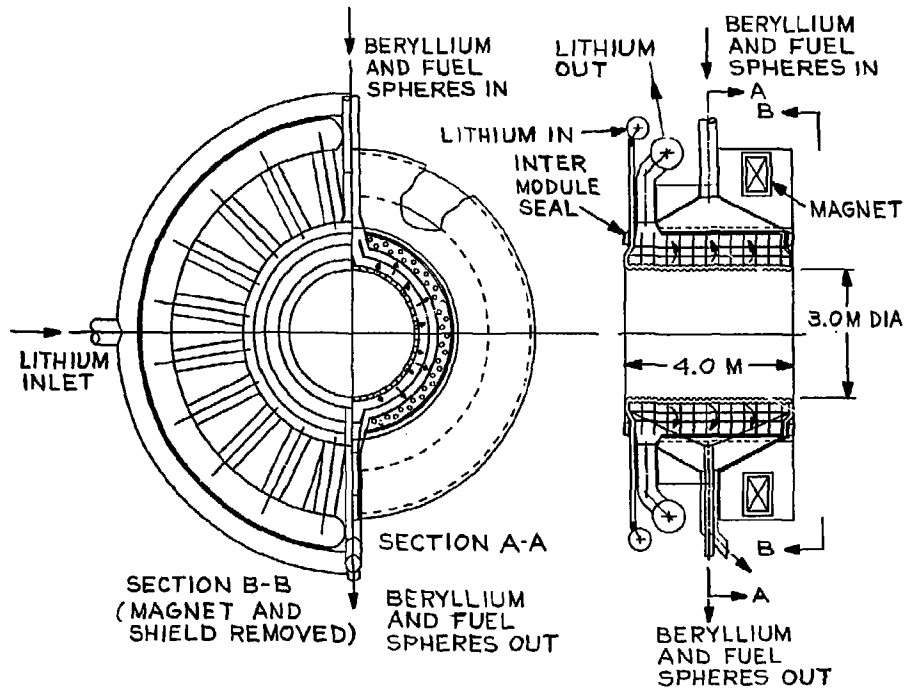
B.1. Component arrangement and dimensions for the Fusion Breeder Reactor reference liquid metal direct cooled blanket module assembly - sheet 1.
